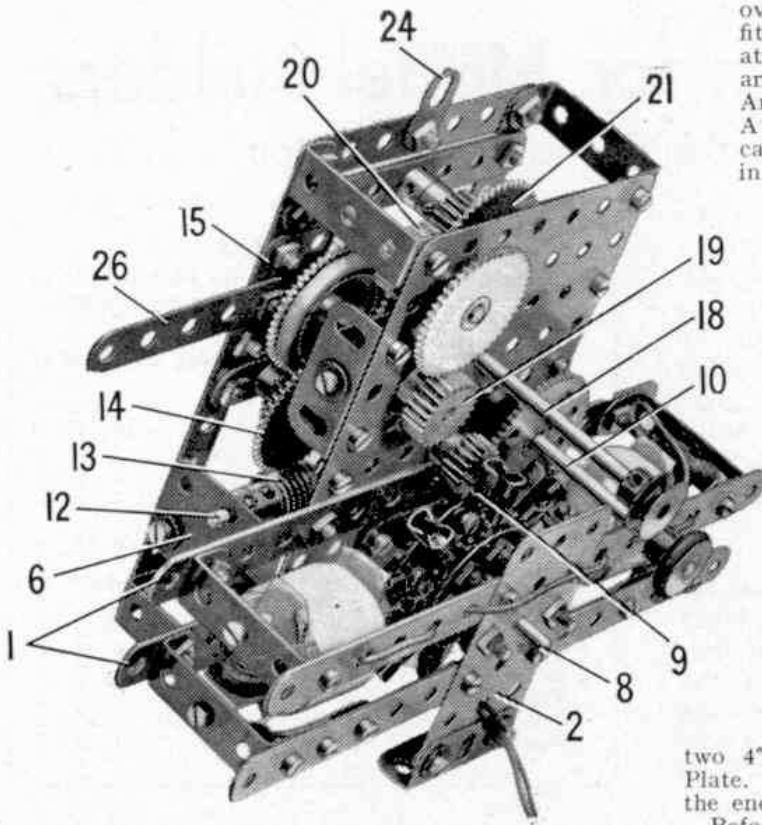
The clock mechanism removed from its case, showing details of the field coil mountings and the rotor of the synchronous motor.
